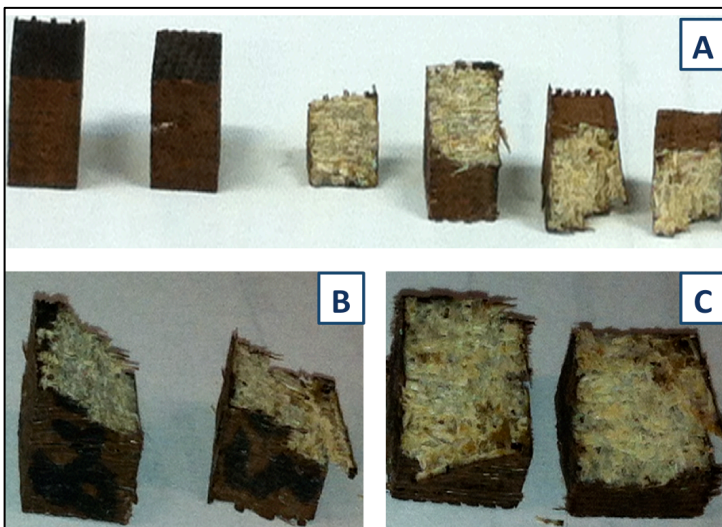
Photograph of glass reinforced epoxy after rupture under impact loading
